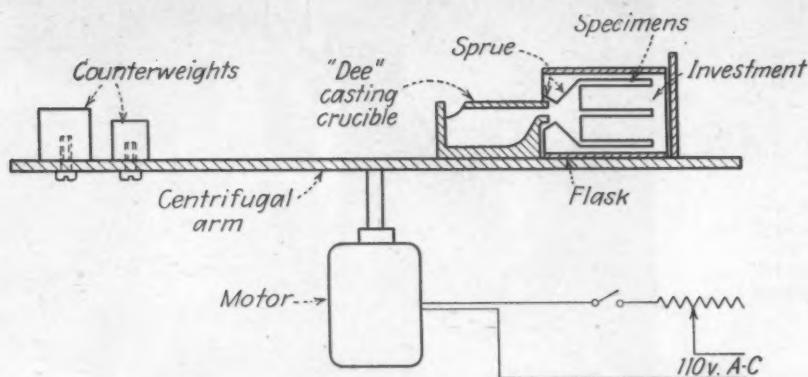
Schematic representation of the centrifugal casting machine. The molten metal is poured into a crucible which is so designed as to hold the metal until the apparatus starts spinning whereupon the metal is acted upon by centrifugal force accelerating it in an outward direction and into the flask.
